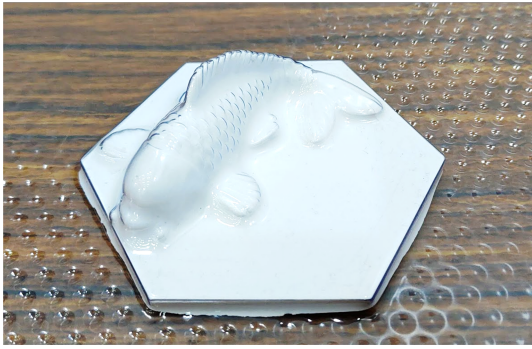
After the blister is formed, the blister is used as a mold for casting with plaster material.
